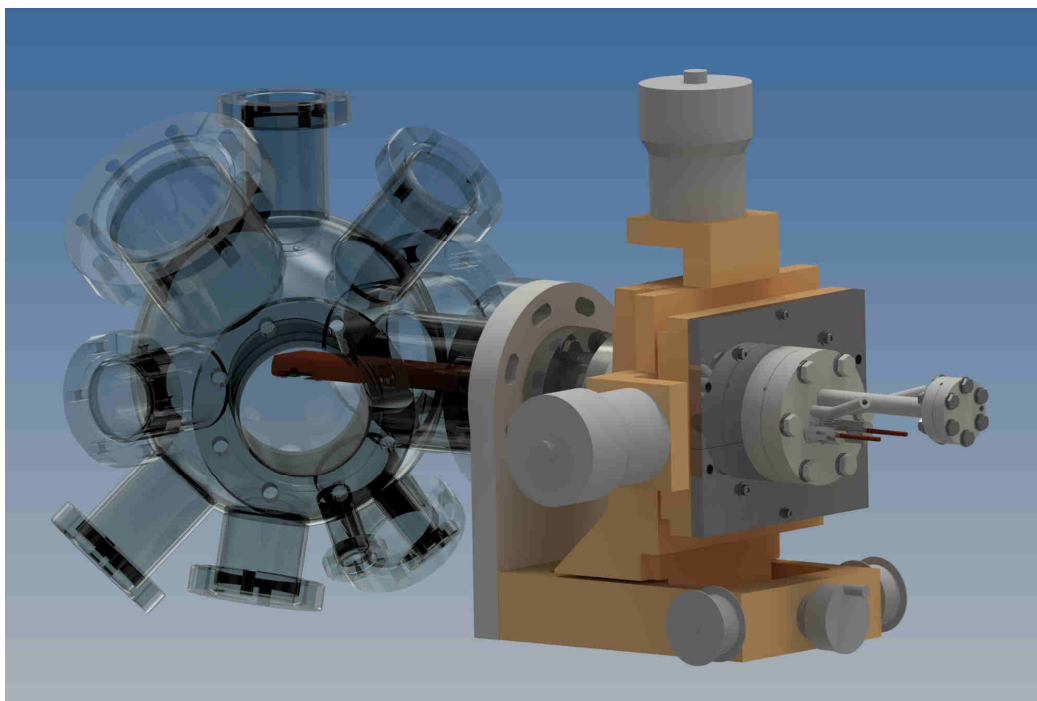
3D model of the modified manipulator. The assembly is coupled to a CF 63 flange on a transparent virtual chamber to demonstrate the general size of the assembly. The sample holder on the reservoir stands at the center of the spherical chamber.
